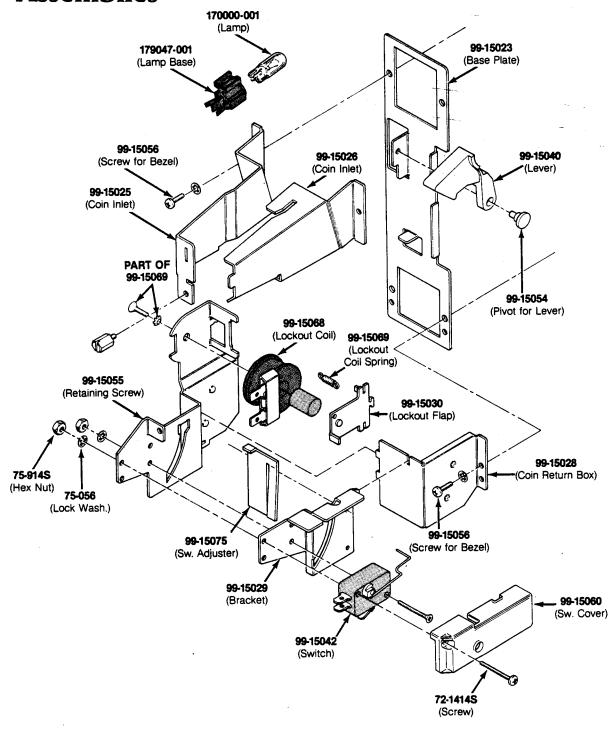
Vertically Mounted Coin Door A037619-xxx D
